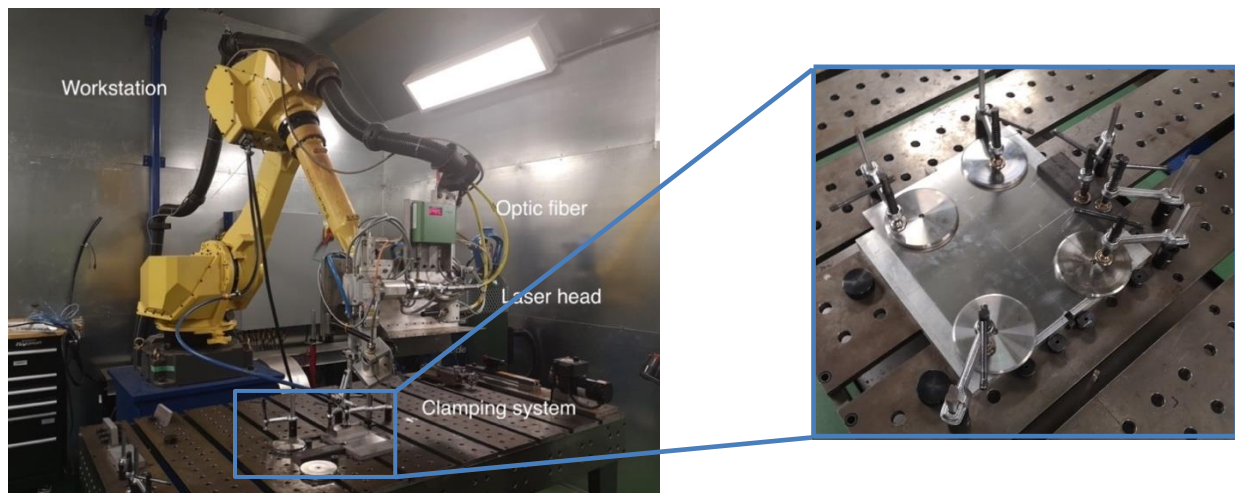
Laser welding machine & clamping system
